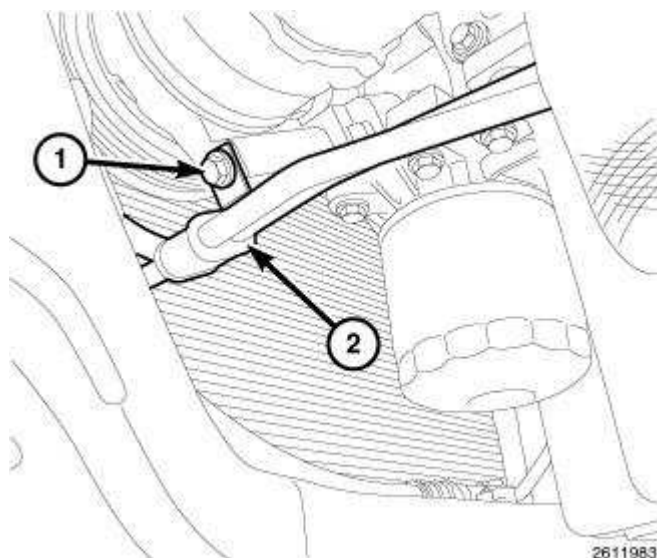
A/C Compressor Mounting Bolt & Transmission Cooling Lines
